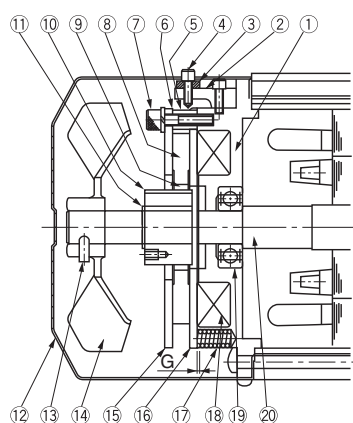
FB-01A1,02A1,05A1 (0.1kW~0.4kW×4 Poles)
